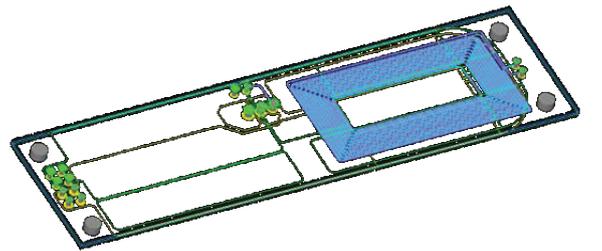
Design of the Flat Magnetics, PCB 2nd layer
